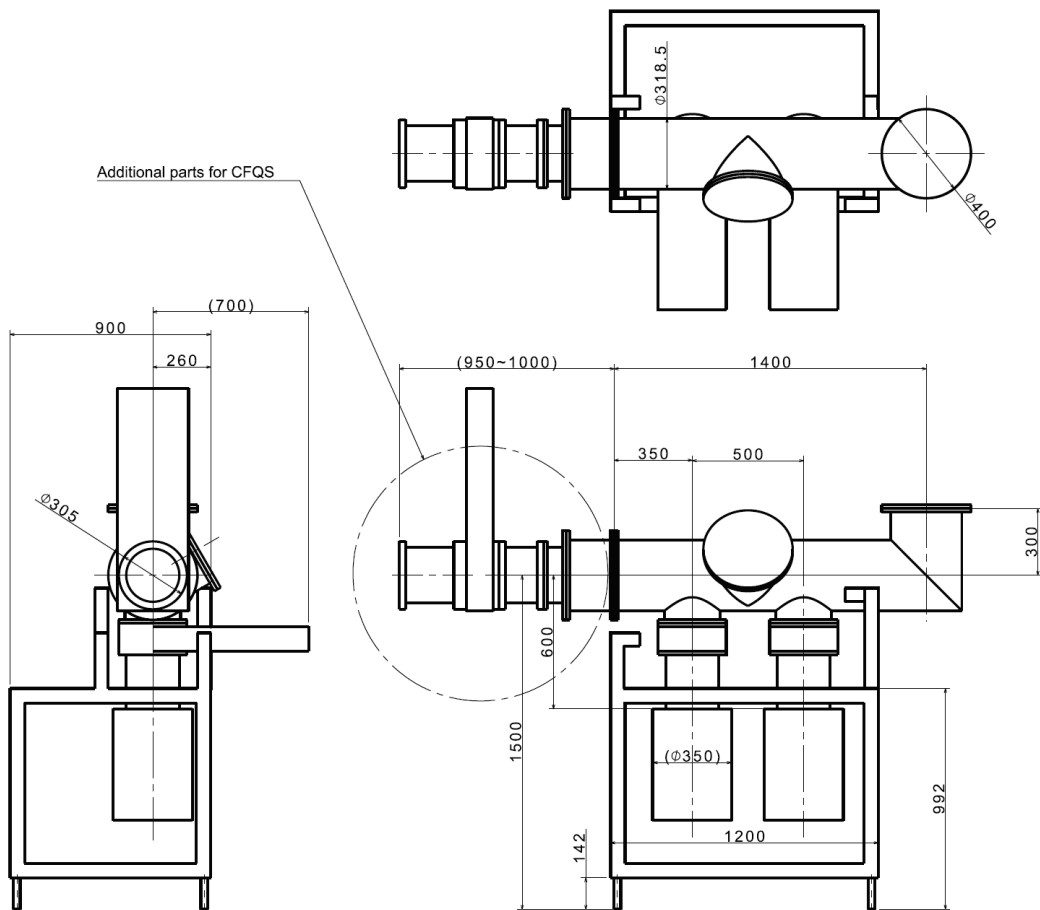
Layout of the vacuum pumping unit for the CFQS.
